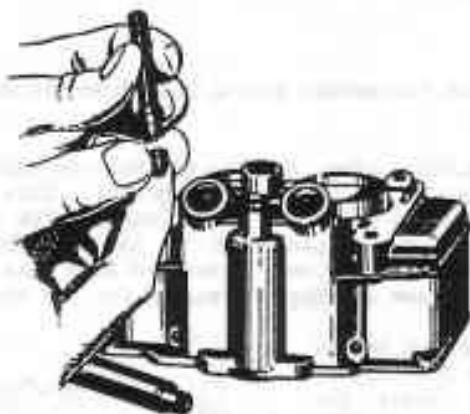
INSTALLING CHECK VALVE STRAINER (1). (Tool No. T 25097).
